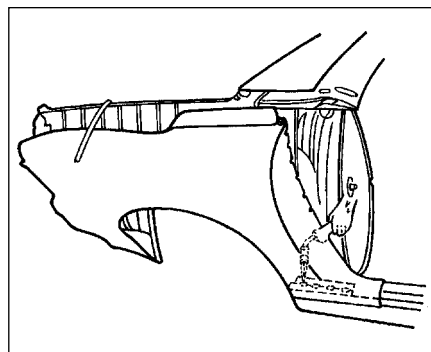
To assure alignment of the quarter panel, the bottom seam is welded first. The upper quarter panel assembly must be held away from the vehicle while drilling out the holes and during welding.
